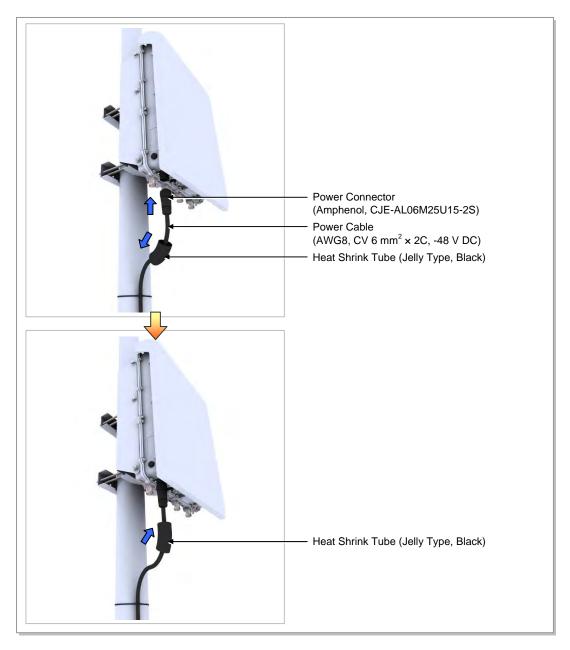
Installing the RRH-2WB Power Cable (1)
